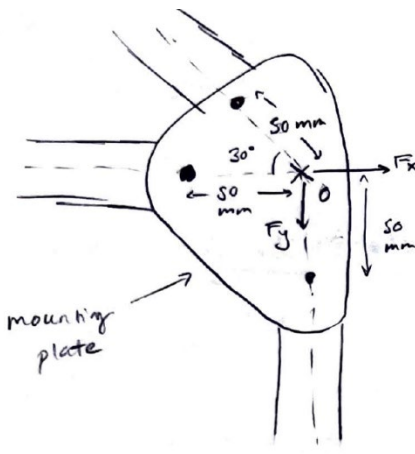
Diagram of Joint with Mounting Plate & Bolts
